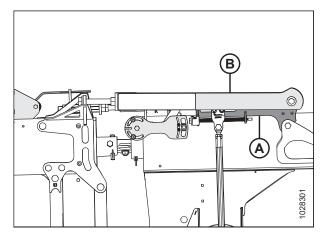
Bottom Edge of Bell Crank Parallel with Top-Link
